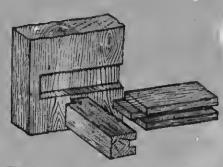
Fixing Framing of Dressing-chest Rails and Bearers,
